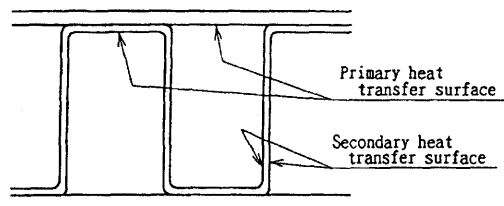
Cross Sectional View of Fin and Parting Sheet
